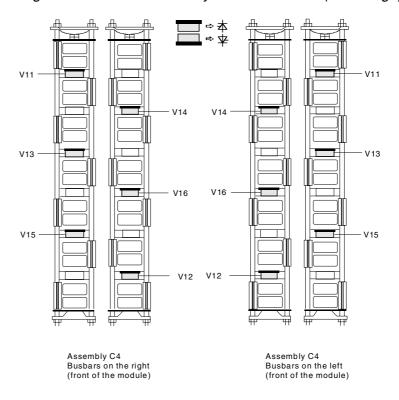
Location of thyristors in frame C4 (2-Q bridge)
